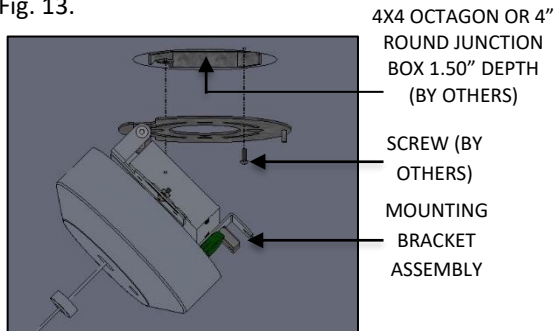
MOUNTING BRACKET ASSEMBLY INSTALLATION
